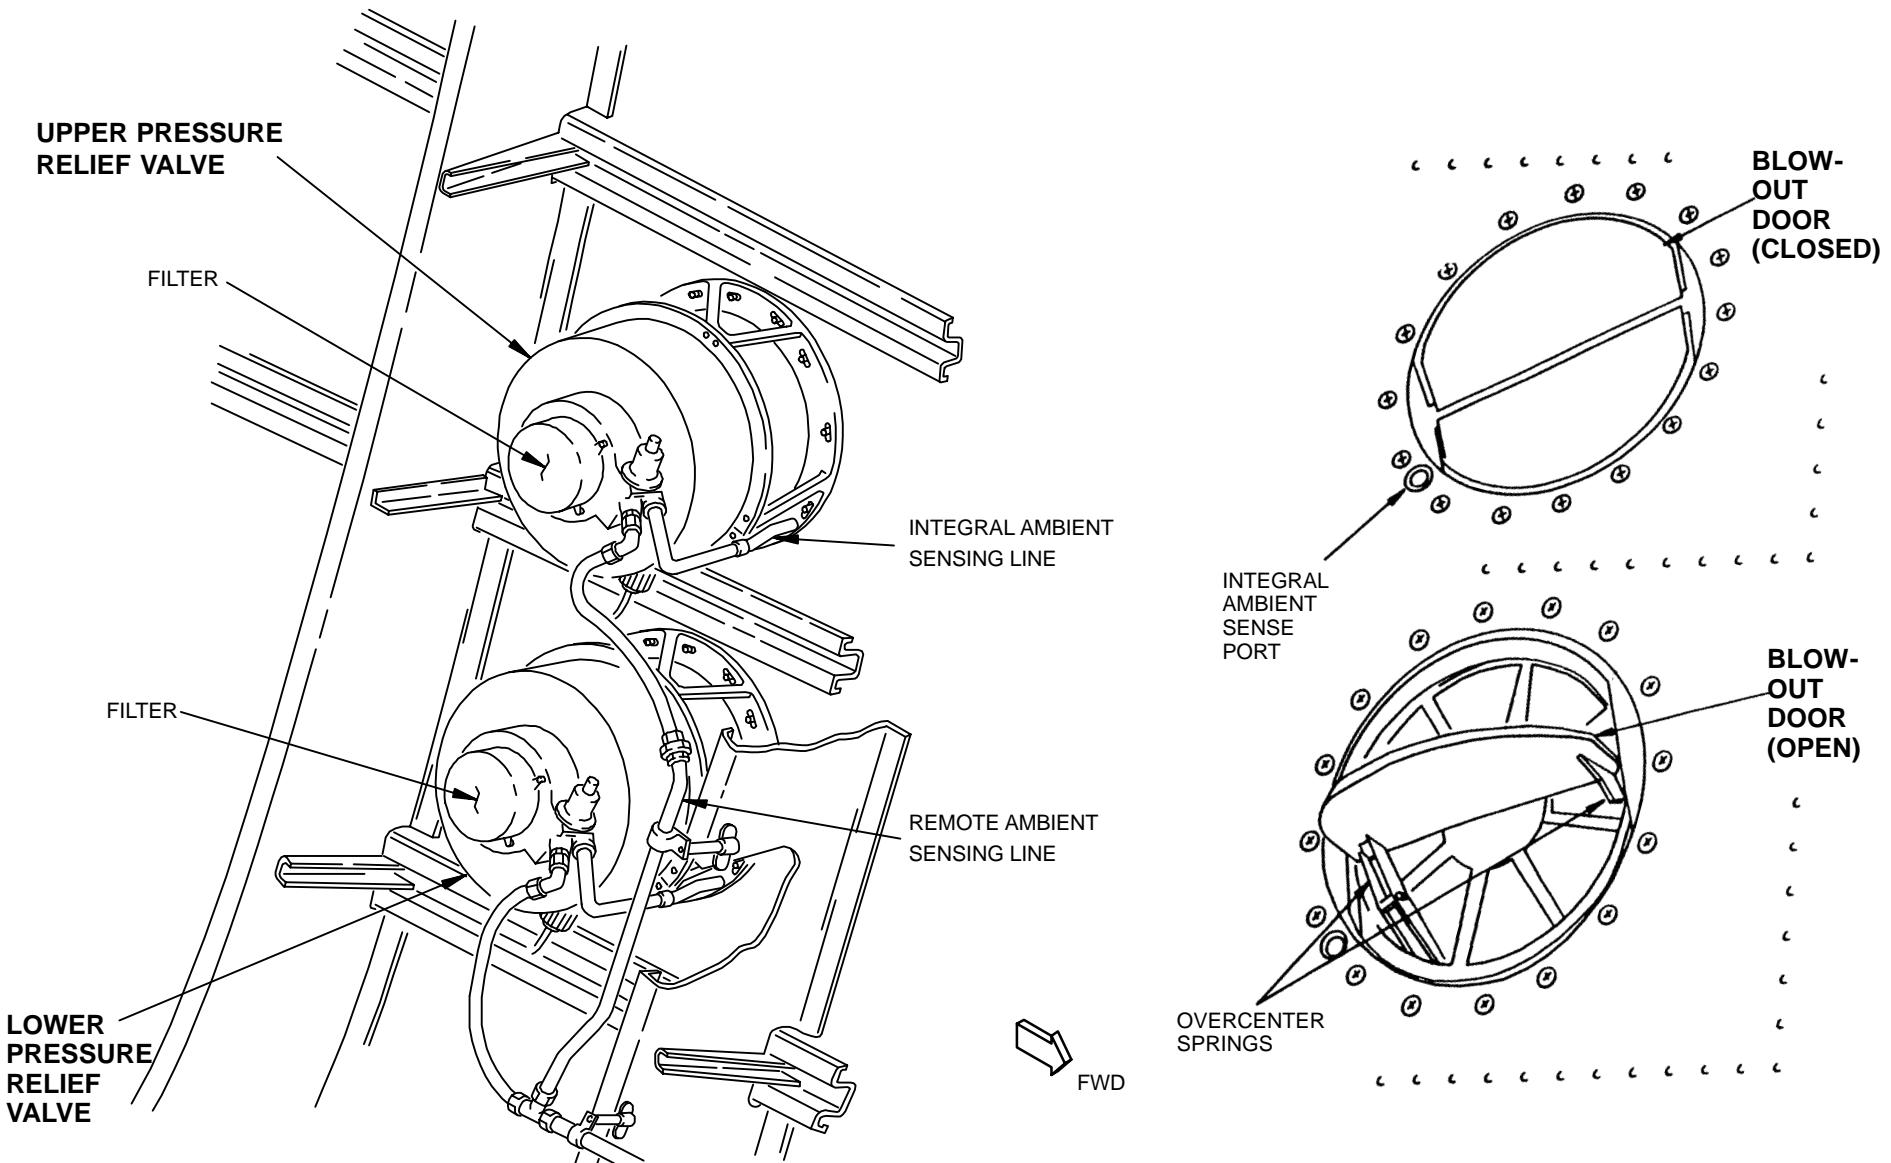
UPPER AND LOWER PRESSURE RELIEF VALVE
